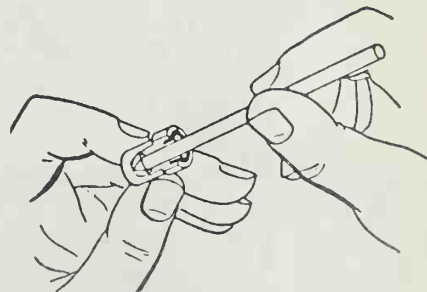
Polish seat using polishing stick and mutton tallow.
